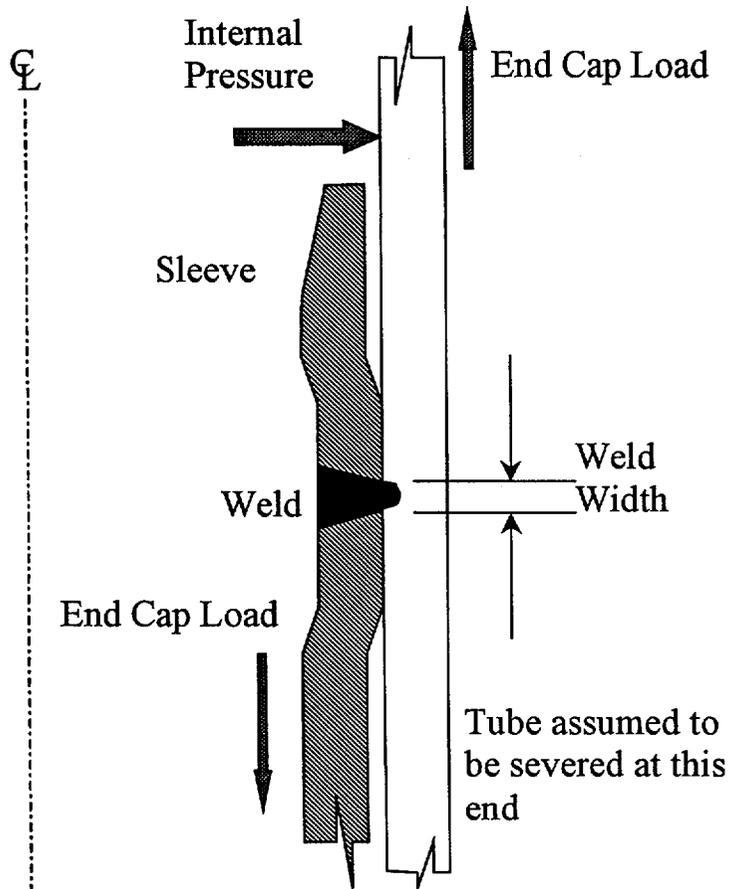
Schematic of the LWS Sleeve-to-Tube Weld
